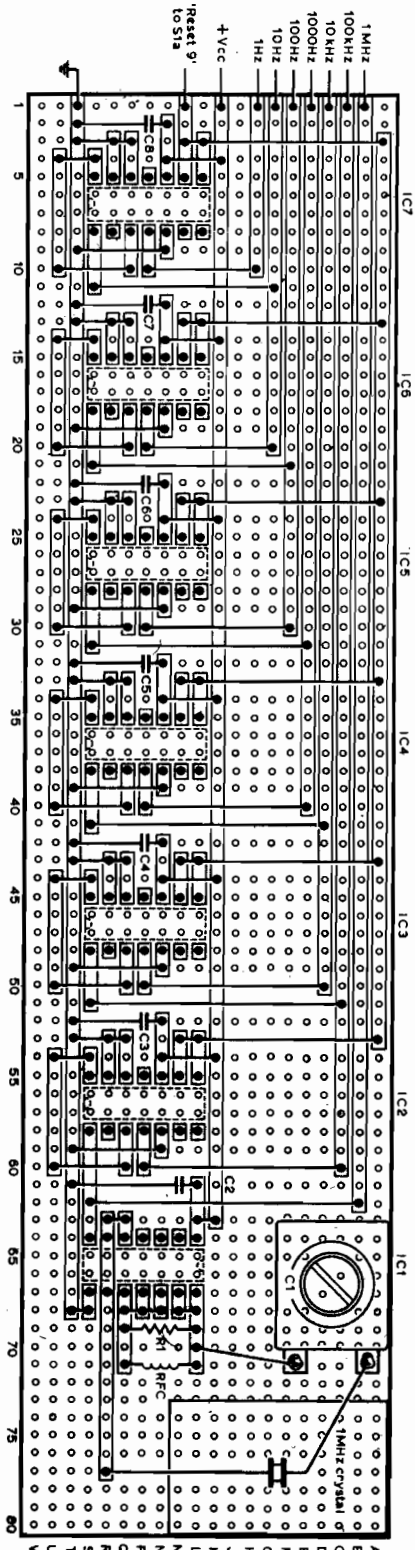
Veroboard layout of the clock board viewed from the copper side, the link wires and components being inserted into the reverse side
